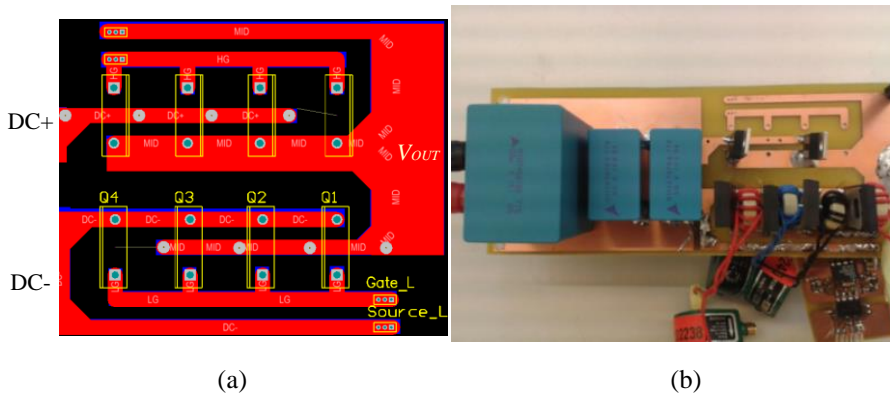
PCB layout and double pulse test PCB circuit (a) PCB layout (b) PCB circuit hardware setup
